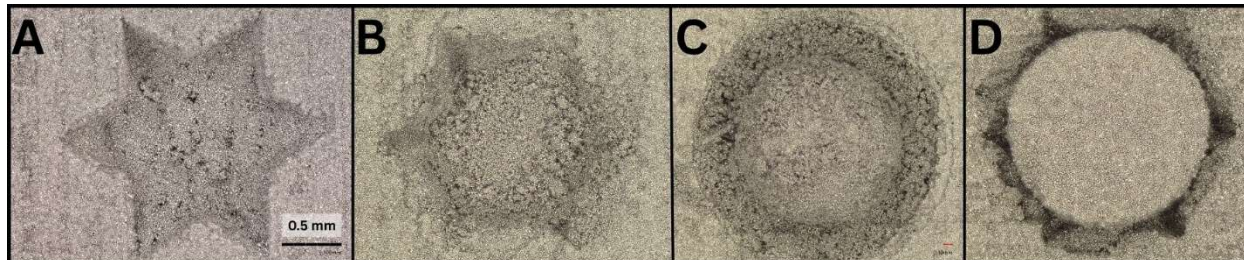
Printed alignment features. From the left they are 1) a star hole after printing 2) a star hole after having a post inserted and removed 3) a post after being inserted and removed 4) a post stuck in the star hole.
